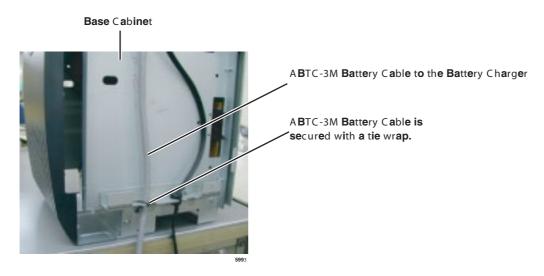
Cable Wiring for a Base Cabinet Only (Side view)
